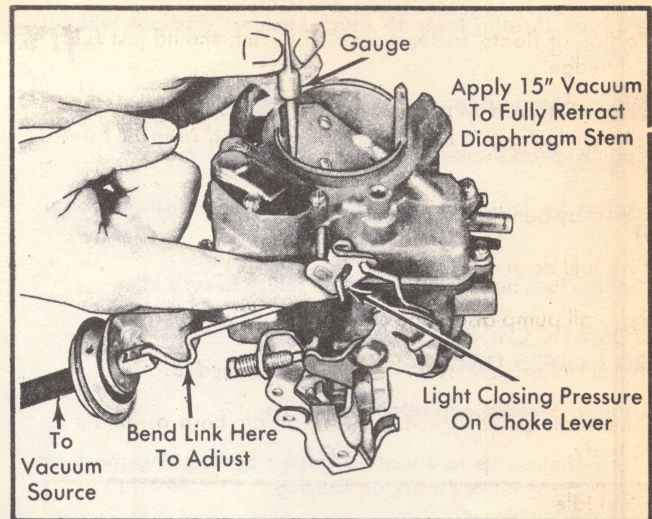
Choke Vacuum Kick Adjustment Procedure
